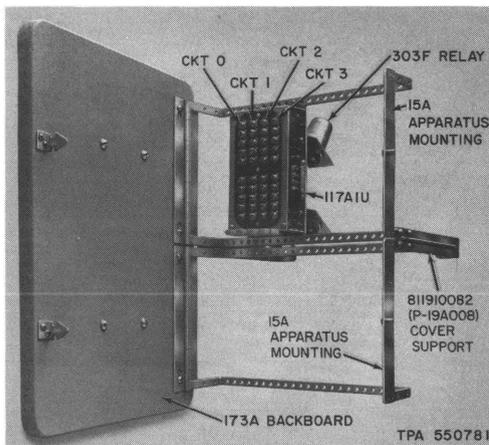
Protective Connecting Arrangement RCX (Rear View)
